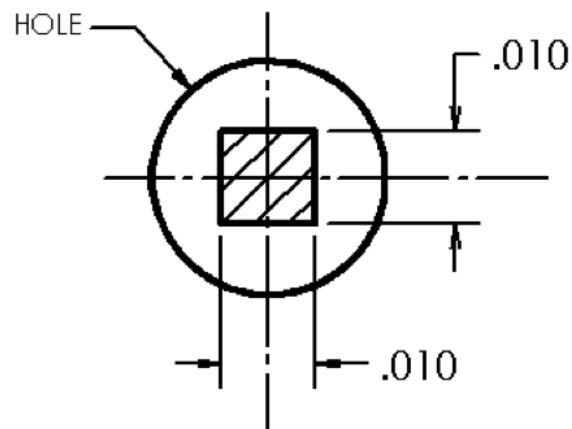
Tolerance zone for a hole dimensioned with TD&T.
